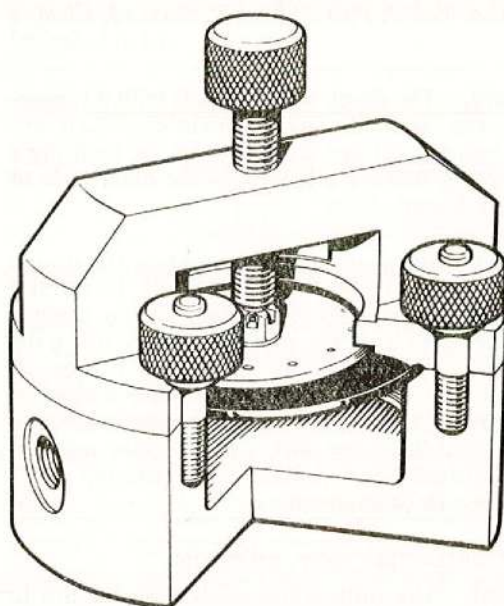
Pressure testing the linking valve diaphragm (fixture T.222022)
